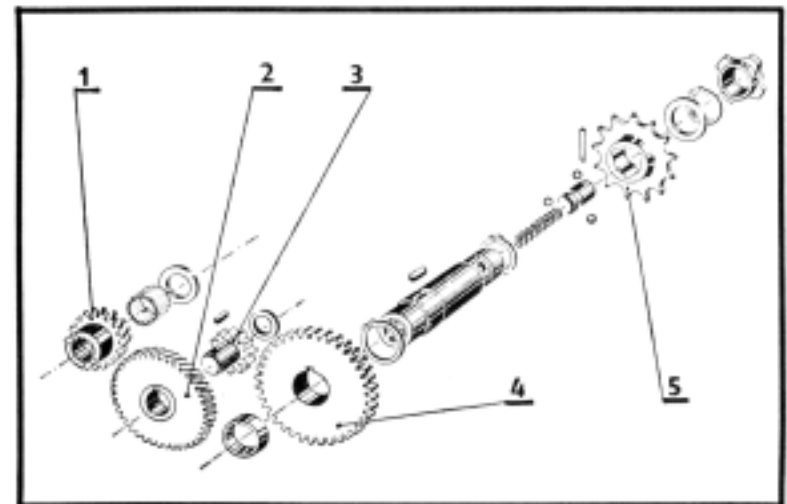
Jawa uses a rather complex collection of parts to lock the engine out of the drive train.
